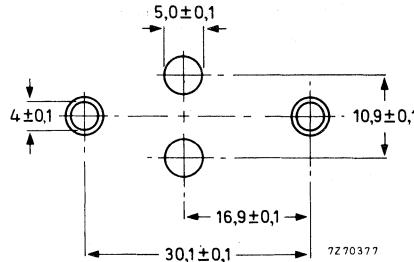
Hole pattern for 500 V insulation, nut fastening.
